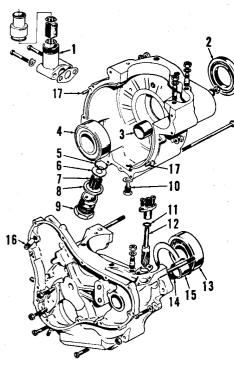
Exploded view of crankcase assembly. Breather (1) is used on 1972 & 1973 750cc models. Breather tube (16) is used on all 850cc models.
